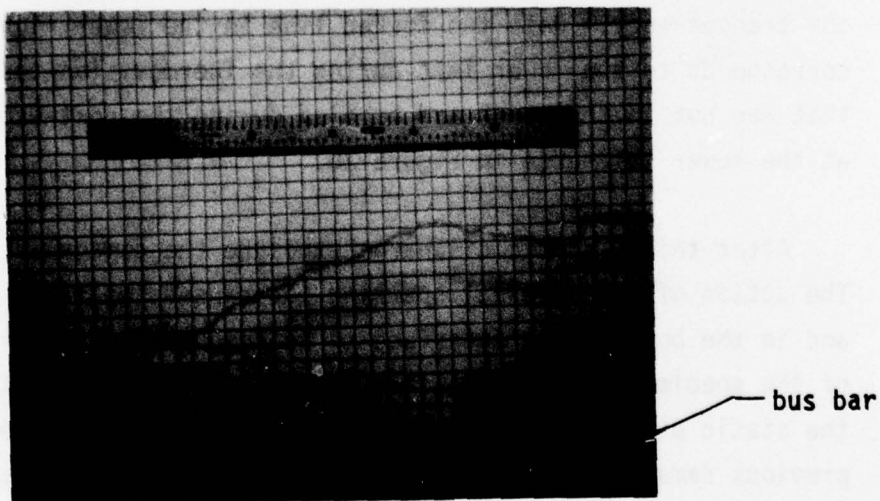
Static Enhanced View of Lightning Damage to -1B.
